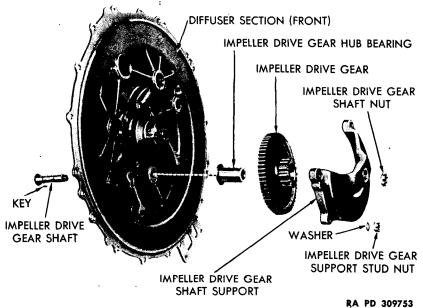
Impeller Drive Gear, Shaft, and Support Disassembled
